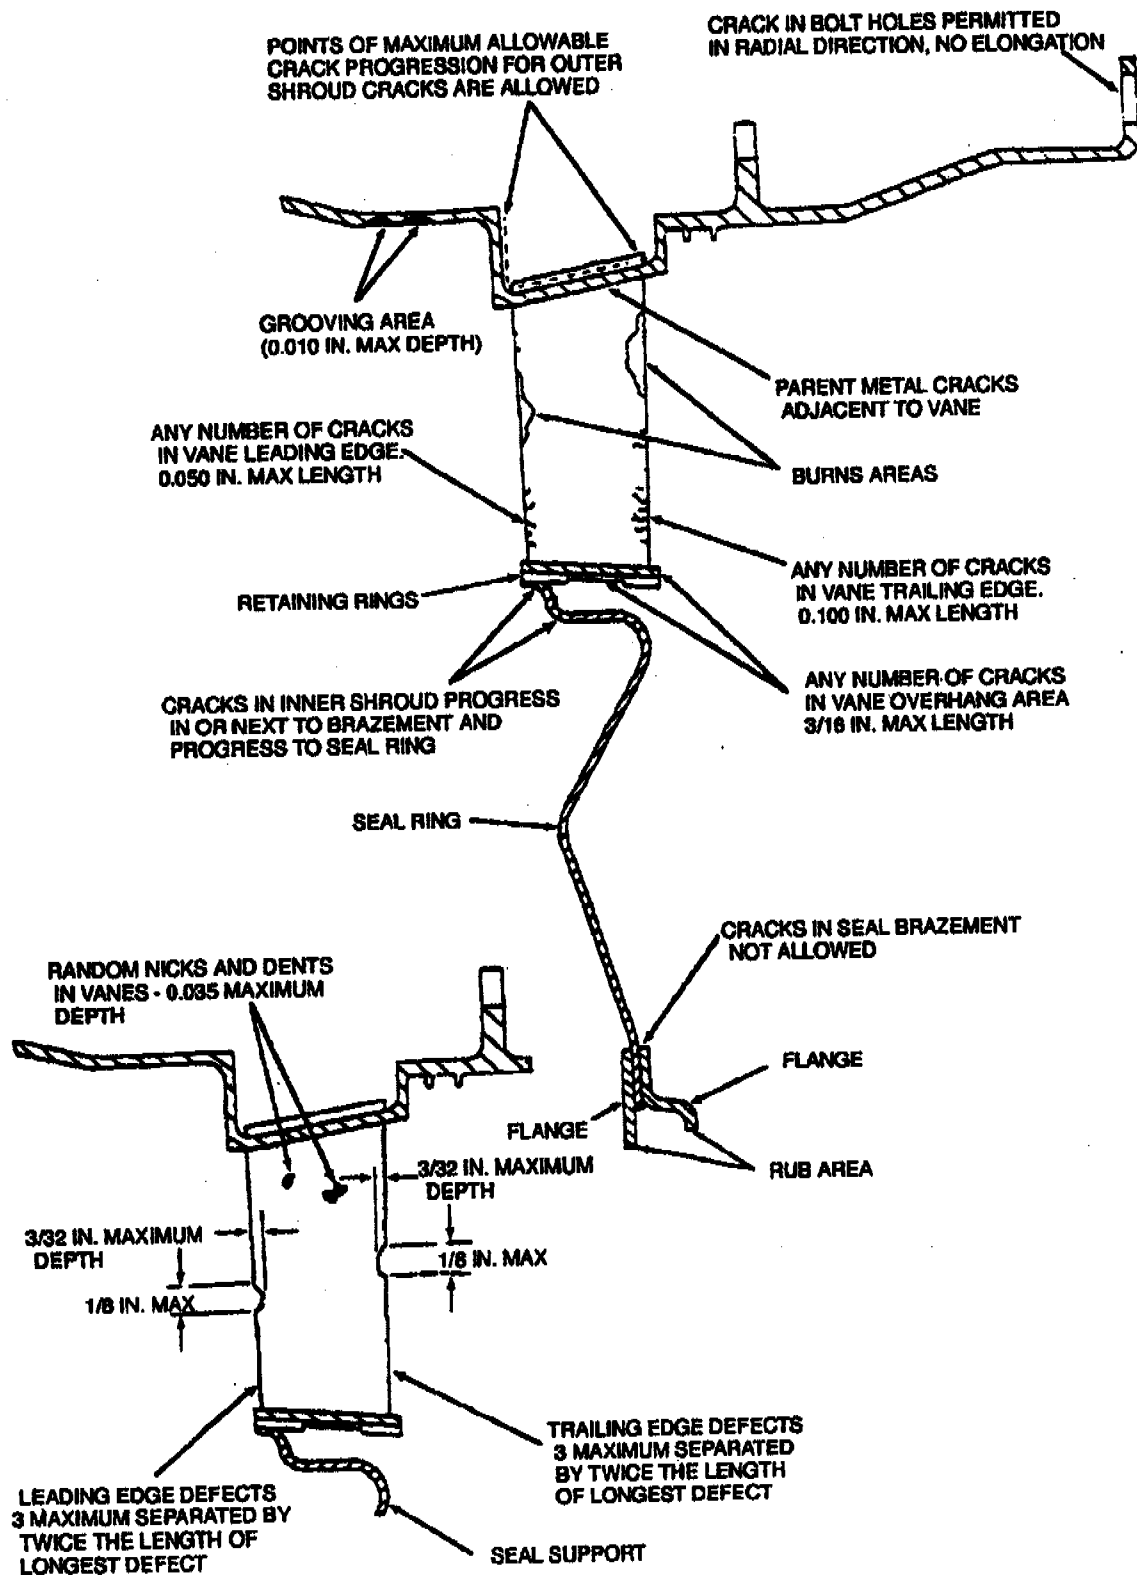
First Stage Power Turbine Nozzle (1-190-000-09) Inspection Areas.
